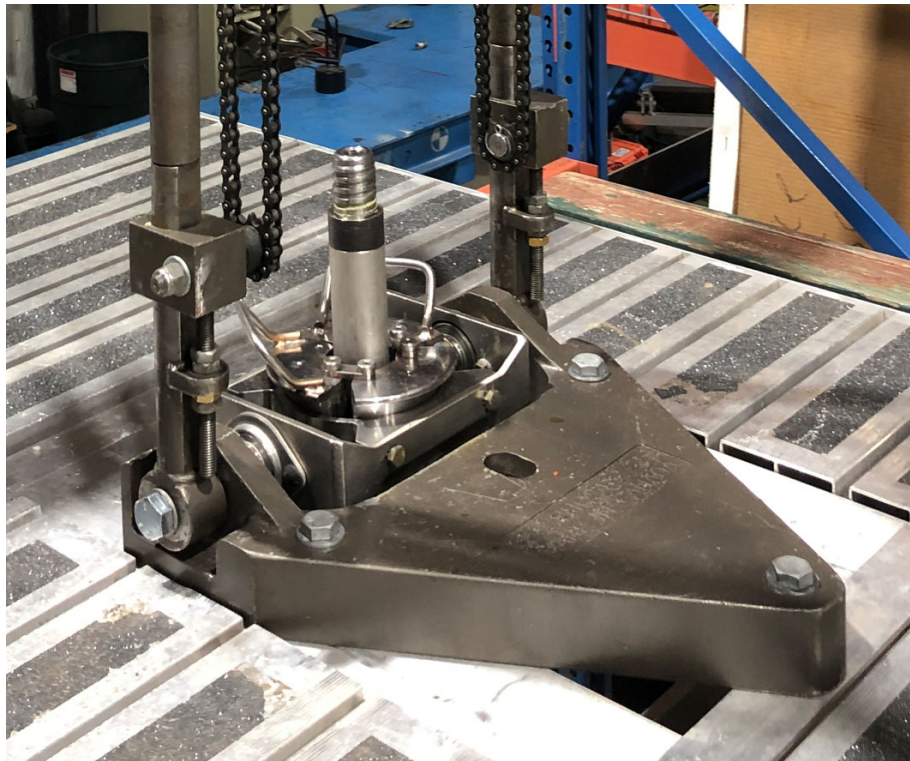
Slip foot clamp assembly shown with AW drill rod jaws installed. Note there are two sets of jaws that accommodate the different diameter drill rod and casing.
